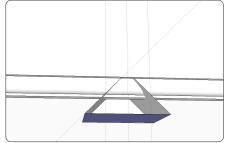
Draw cutting planes to remove material for a socket to hold the vertical muntin.
